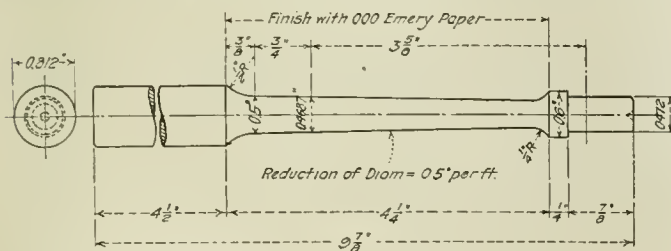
CANTILEVER TEST PIECE USED IN FATIGUE TESTS
